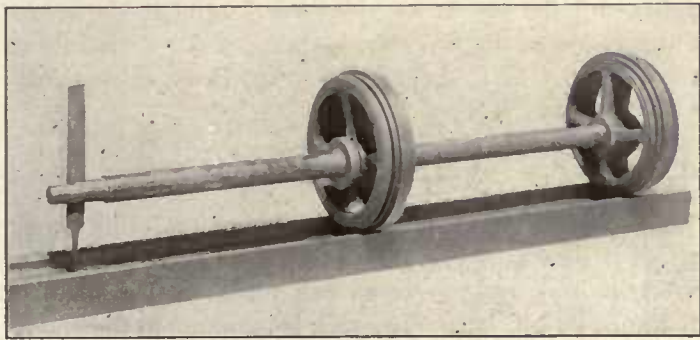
Parallel Strip for Lining Up Dowel Pins on Piston Valve Spiders.
